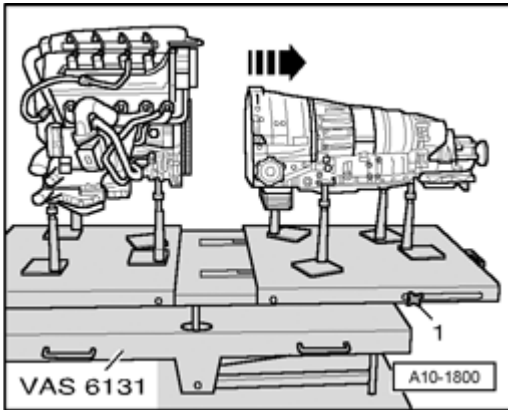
Loosening Side Clamping Screws On Scissor Lift Platform VAS 6131 And Pulling Rear Platform Top With Transmission Toward Rear
